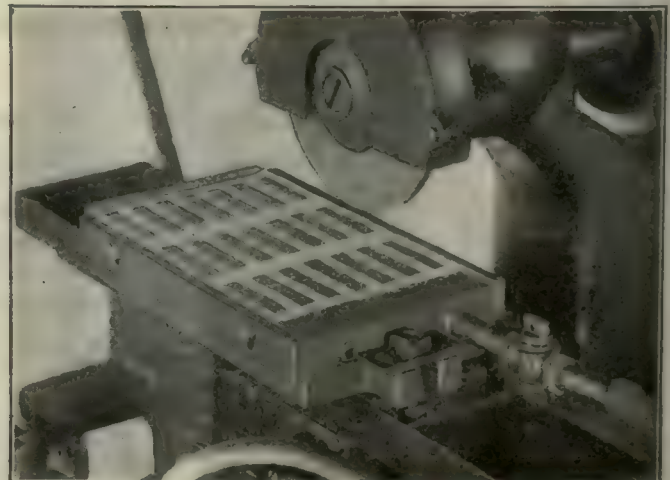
LARGE CHUCK PLATE WITH GASKET FOR MULTIPLE PIECES
